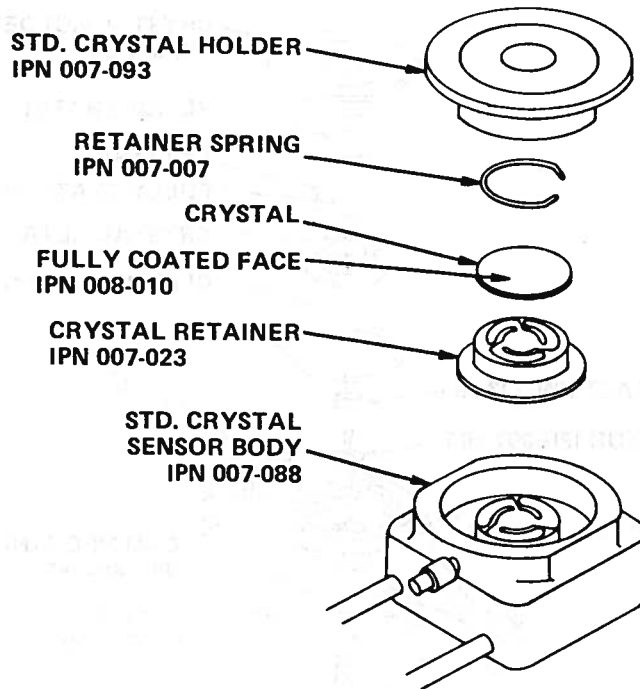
Regular Crystal Sensor (Exploded View)
